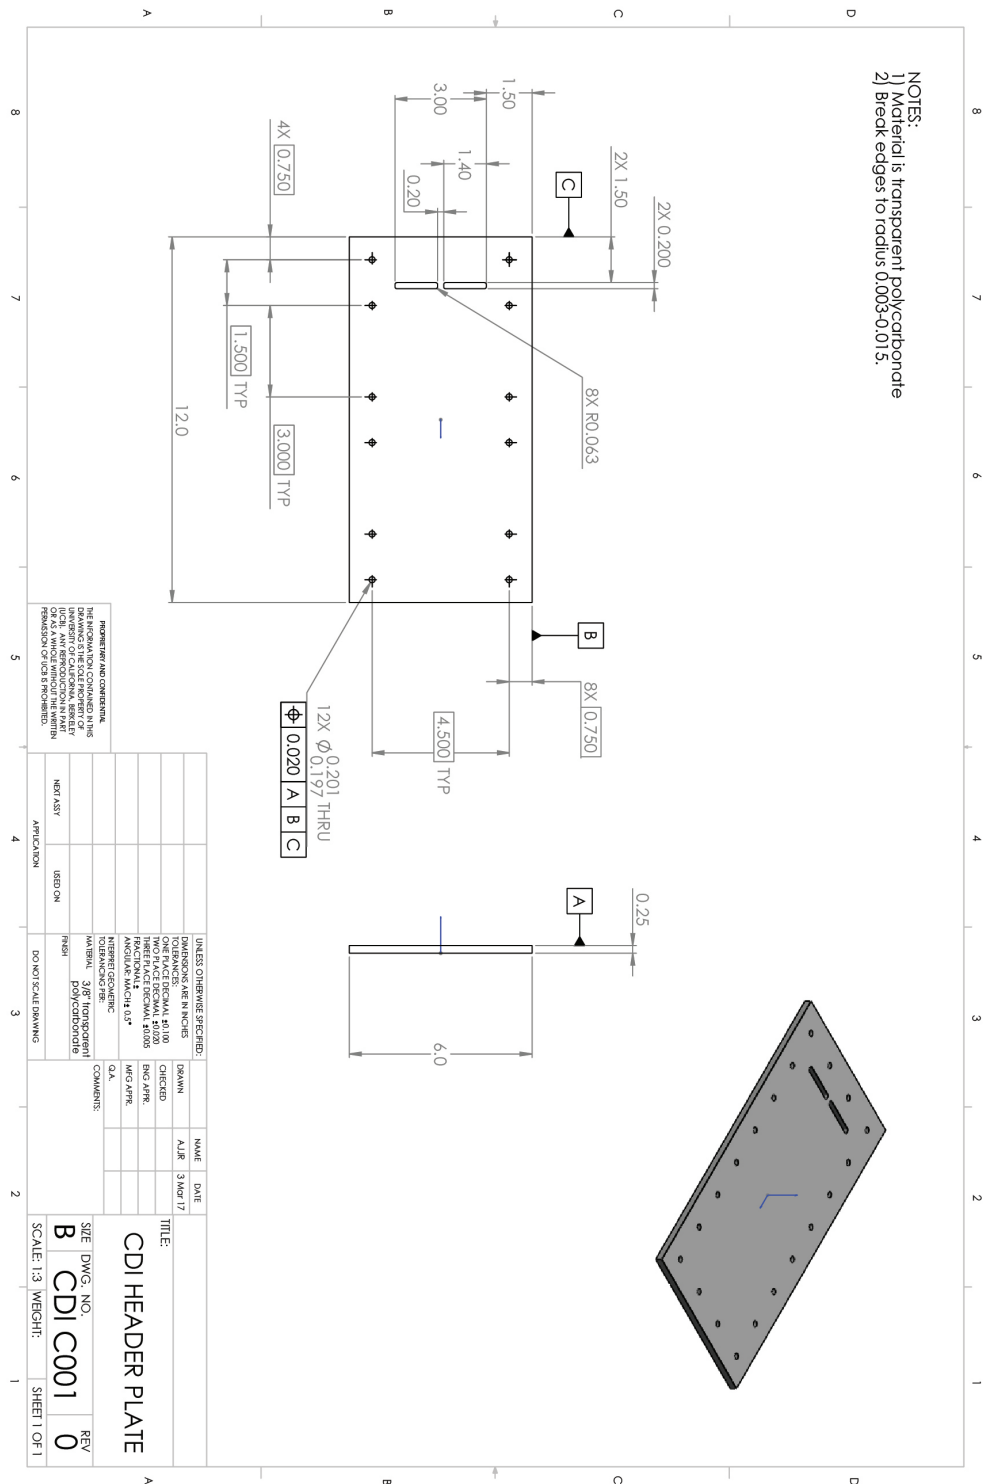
Design drawing for CDI Header Plate, created in SolidWorks.
